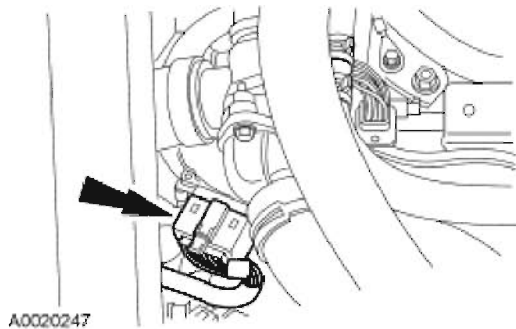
Locating Transmission Fluid Cooler Tube
